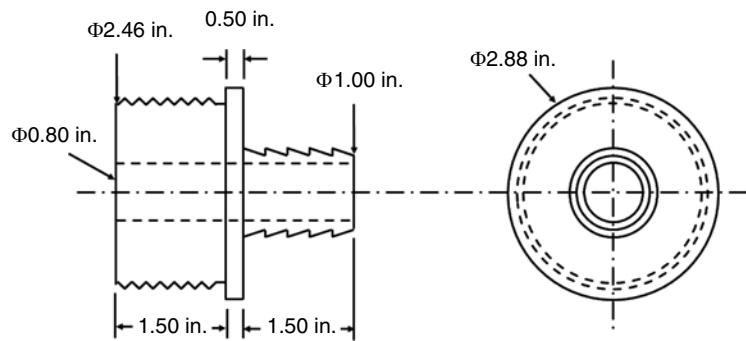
Technical drawing of a thread-to-hose adapter designed to connect the main pipe to a 1 in. plastic hose.
